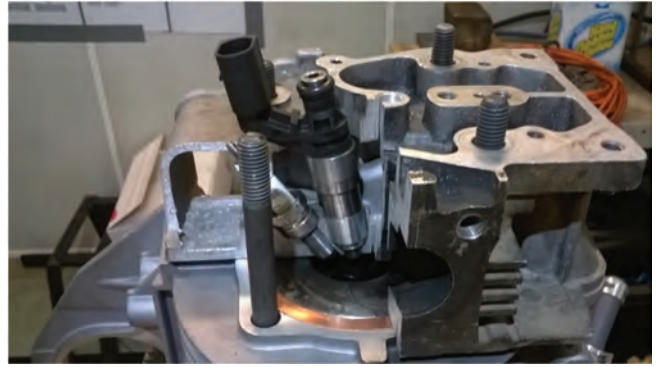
The scope of structural changes of the engine head adapted for spark ignition and direct hydrogen injection
